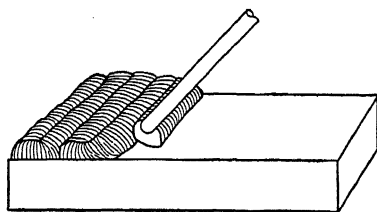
Keep the tops of the beads level. Weld one half into the previously deposited bead and one half into the base plate.
